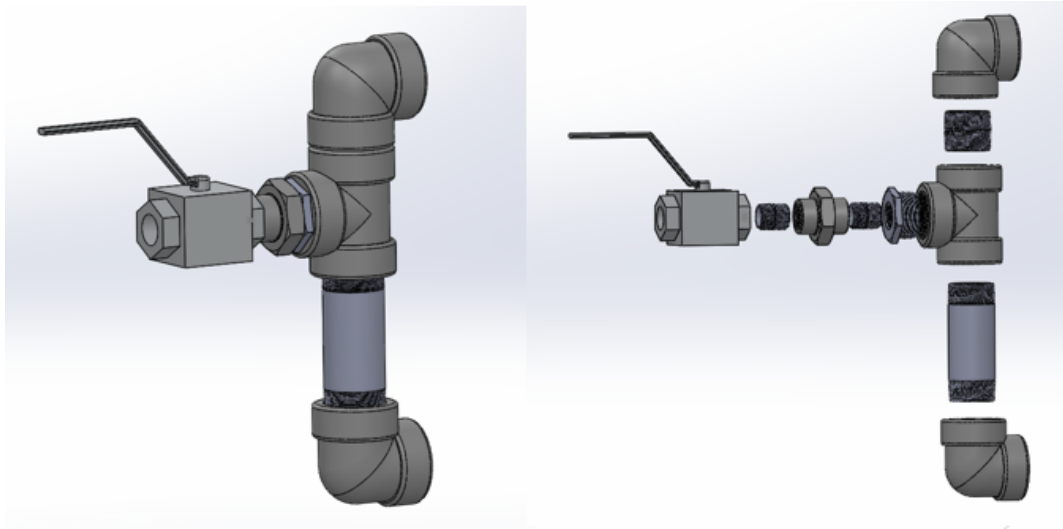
Manifold addition assembled to supply air to the rocket nozzle test stand on the left. Blown up assembly of the manifold addition on the right
